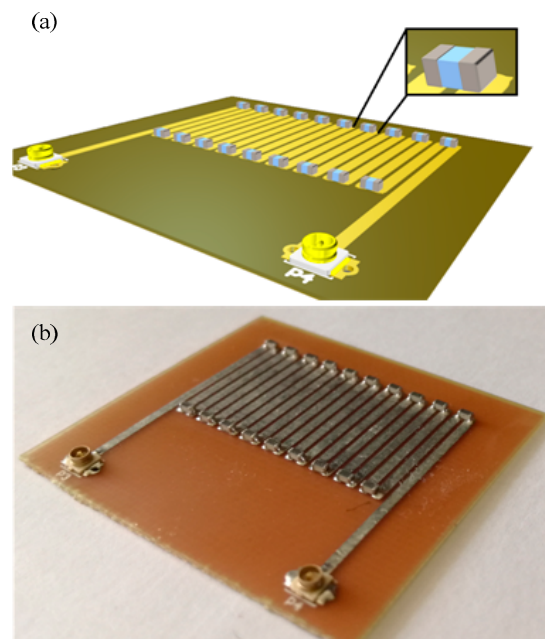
The hybrid meander system: (a) PCB model and (b) manufactured prototype (zoomed image).
